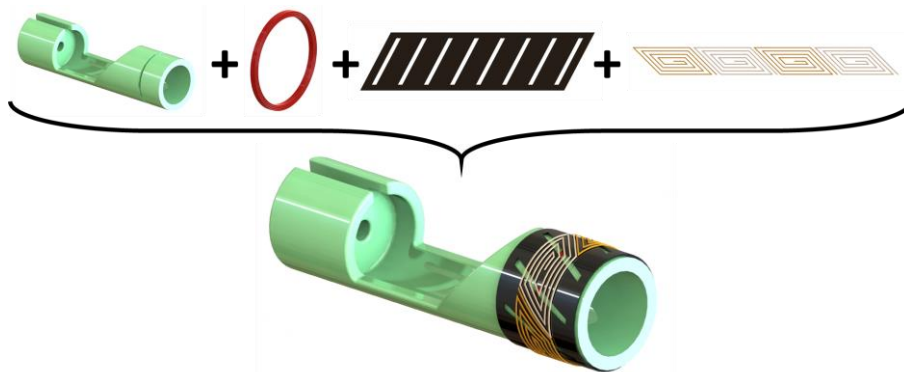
Components required for the MPPS EC probe assembly: 3D printed chassis; simple circular winding; MPPS; sensitive coils array.
